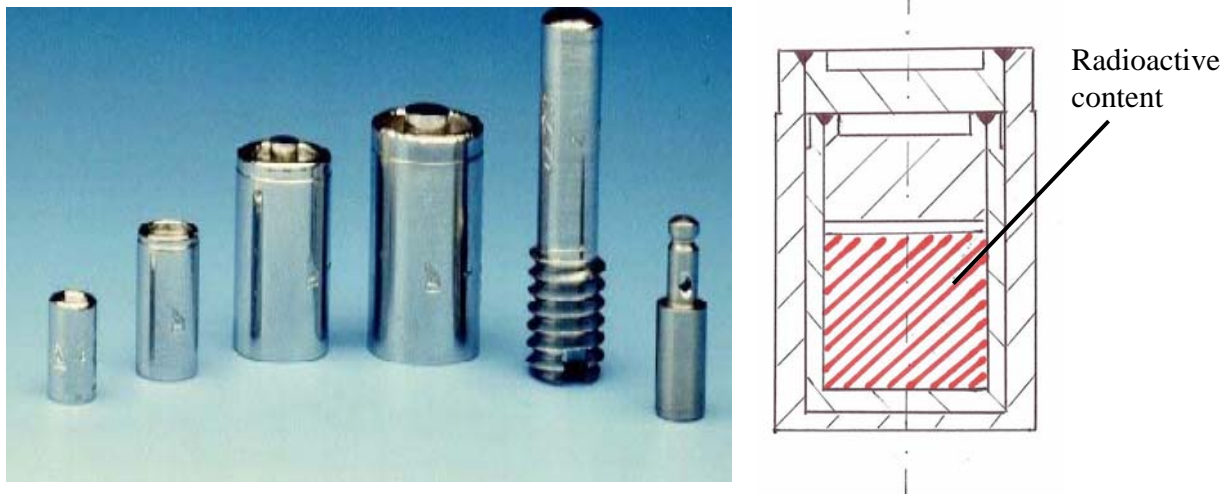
Typical designs of stainless steel capsuled sealed radioactive sources, Manufacturer QSA Global GmbH, Braunschweig, Germany
